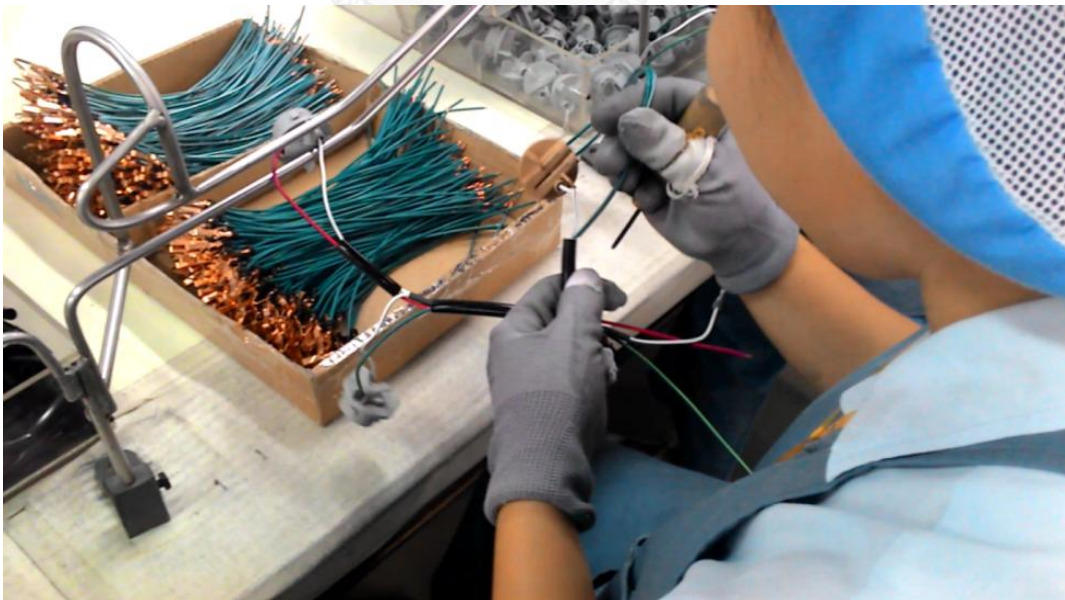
Assemble G wire and G/W wire with Tube 40
